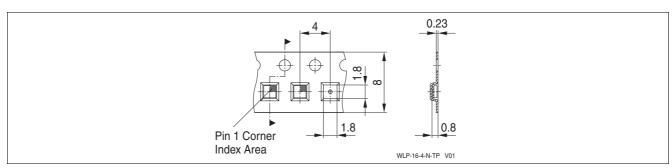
Tape for BGF117 / WLP-16-4 (dimensions in mm)
